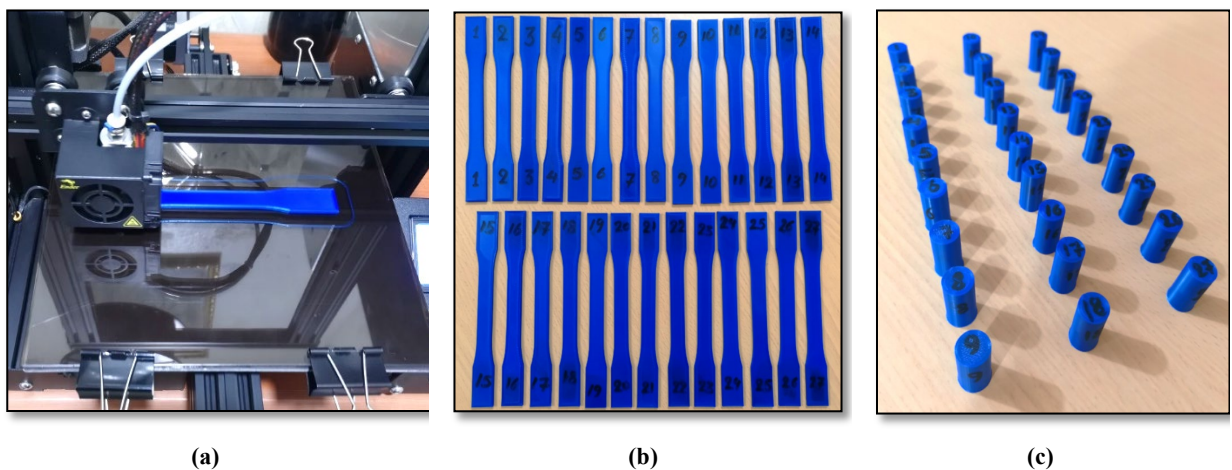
Fabricating the test samples, (a) Printing the sample, (b) Tensile test specimens, (c) Compressive test specimens
